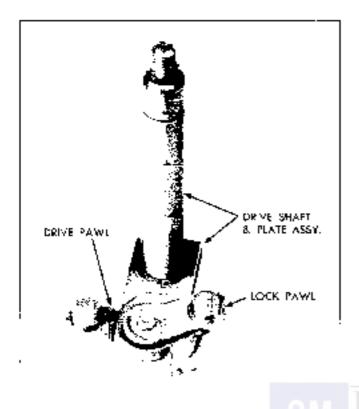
Assembly of Drive Paul to Drive Shaft-Portice
